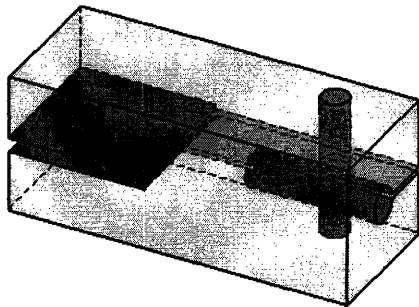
Wing mount to allow angle adjustment. A cap screw in pink hole holds the wing in on shaft (grey) with a friction fit.
